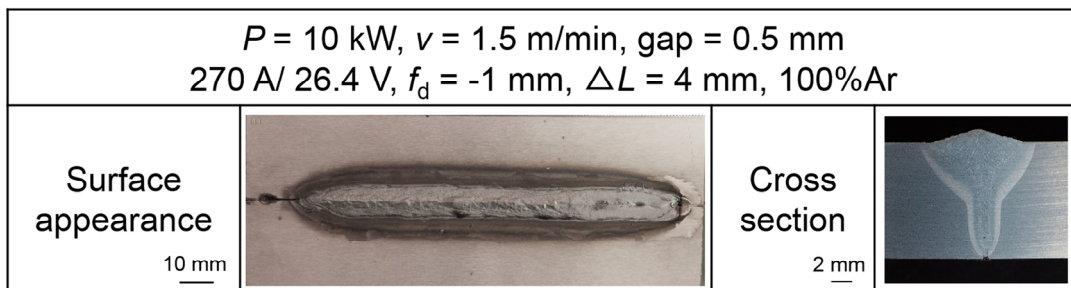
Surface appearance and cross section of hybrid weld bead produced by laser-CMT arc hybrid welding.
